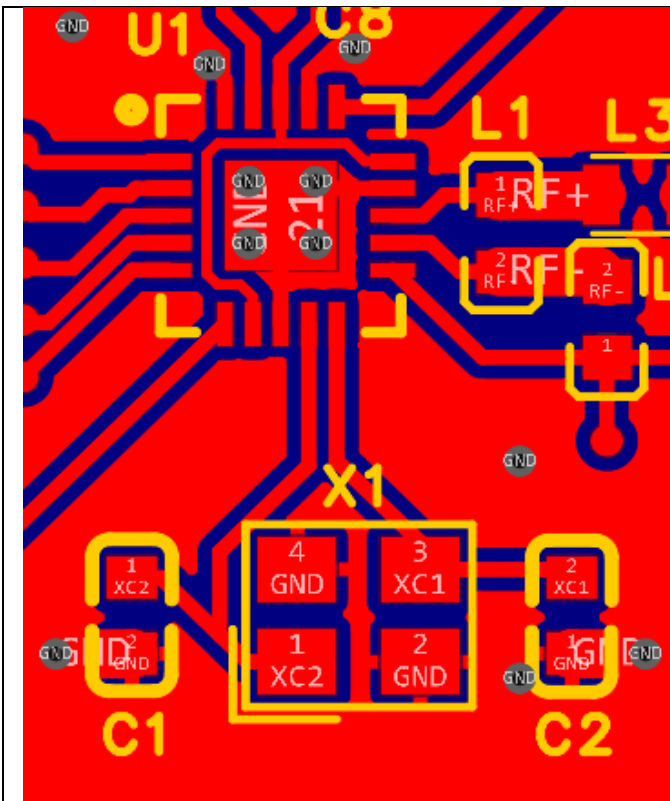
Transceiver V2 oscillator PCB part snippets
